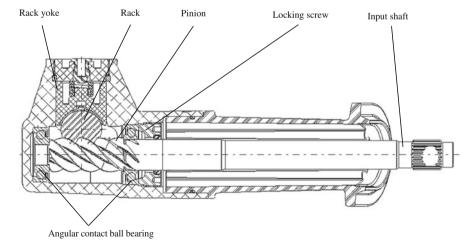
Pinion bearing arrangement with two angular contact ball bearings
